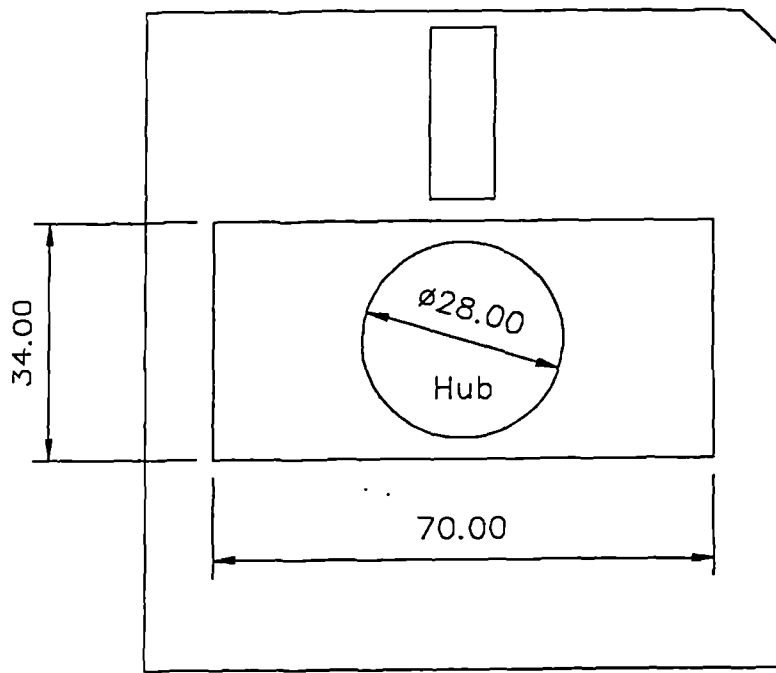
Two dimensional model for an axial multipole magnetizing fixture.
